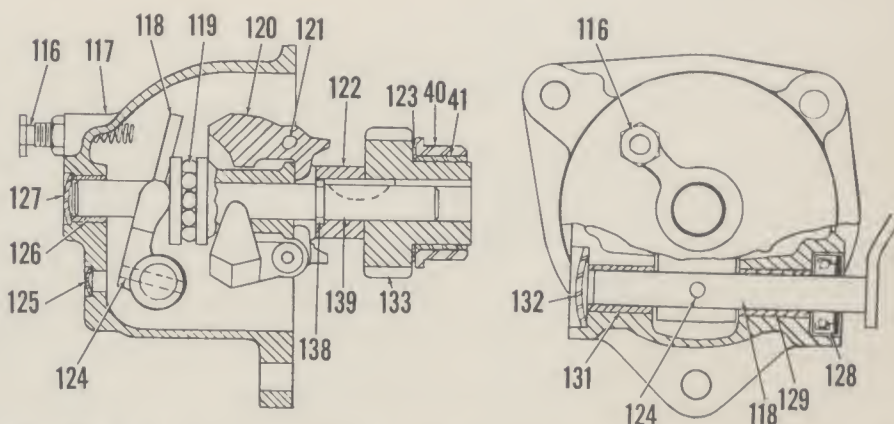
Speed governor assembly used on non-Diesel engines, cross-sectional view. Sleeve (40) and bushing (41) are located in the front face of the cylinder block.
